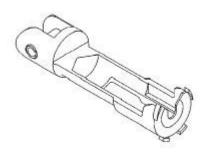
Valve Spring Compressor 8215-A Courtesy of CHRYSLER LLC
